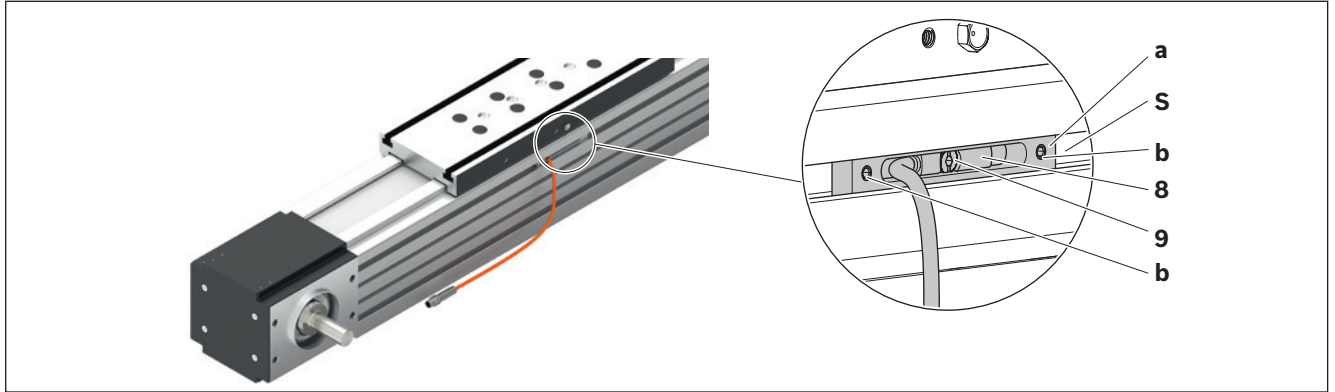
Magnetic sensor MLR-080/-110-NN-3
